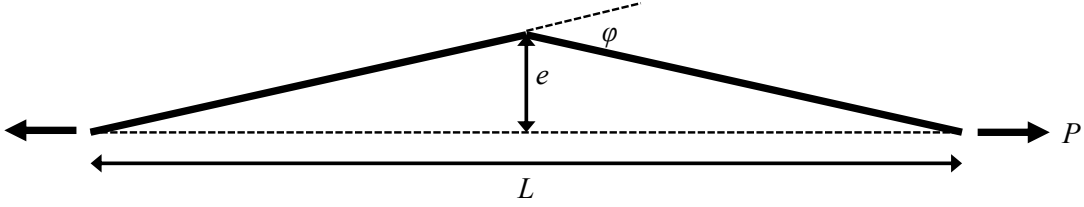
Dimensions considered when defining angular misalignment. The weld axis is going into the page, located at the bend.
